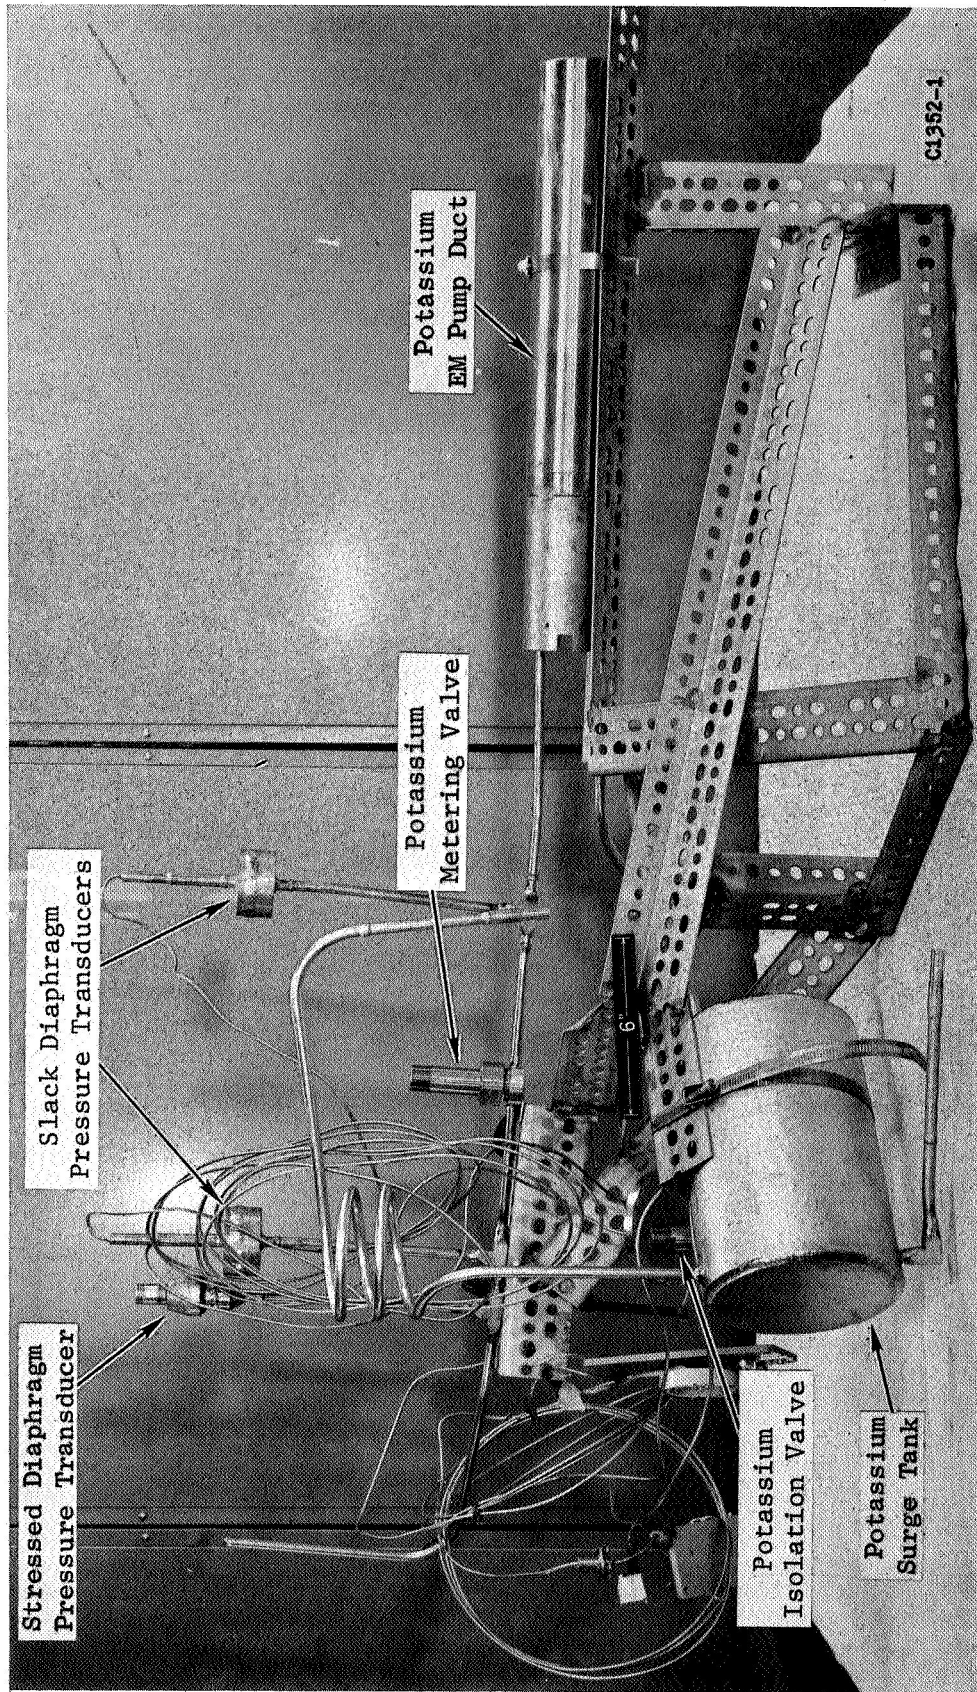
Potassium Surge Tank and EM Pump Subassembly of the T-111 Corrosion Test Loop Mounted on the Welding Fixture. (Orig. C67110669)
